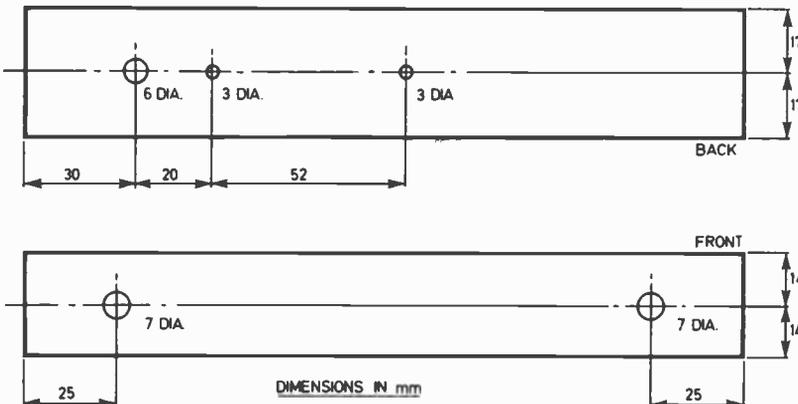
(left). Back panel—aluminium, and front panel—green perspex, drilling details.
